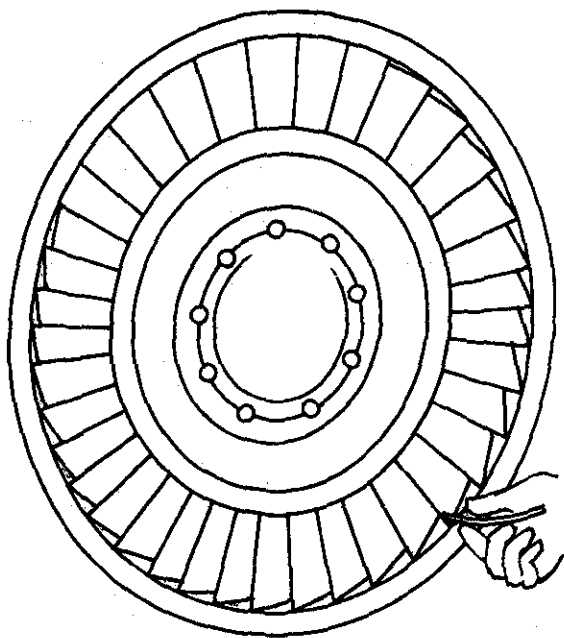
Measuring the turbine blades to shroud (tip) clearances.
